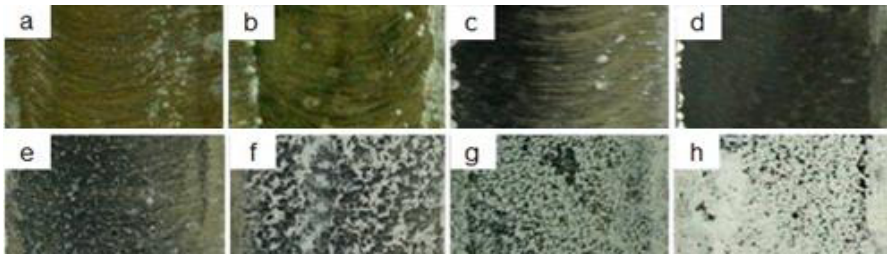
Macro Morphologies of Corroded FS Weld Surfaces. (a) 24hr (b) 48hr (c) 72hr (d) 96hr (e) 120hr (f) 240hr (g) 360hr (h) 480hr.
